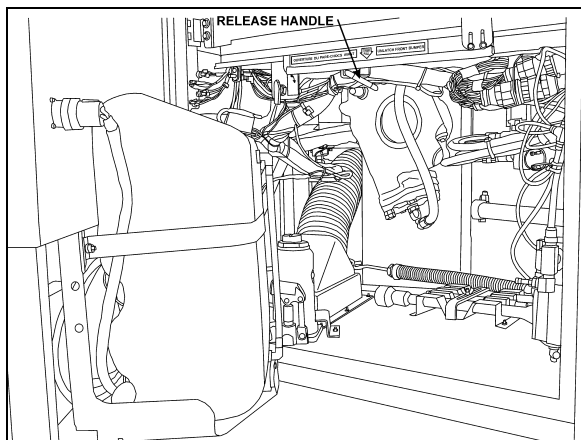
FRONT BUMPER RELEASE HANDLE 18613
